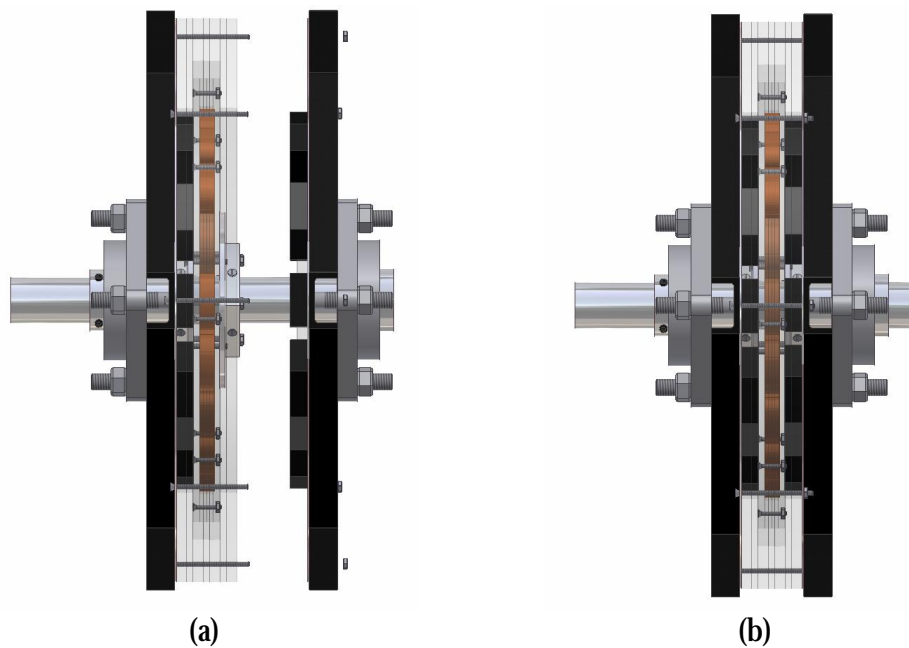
Assembled Generator. The second rotor end should then be placed on the pipe and fastened using setscrews in the bearing. Once the magnets are aligned so that the magnetic poles from one rotor end to the other are North to South, the rotor ends should be fastened using No. 8-32 screws and nuts (a). Once the generator is completely assembled (b), the rotor should be rotated in order to check for scraping of rotor parts against stator parts. If there is scraping, then the rotor should be moved along the pipe so that the rotor is free to rotate.
